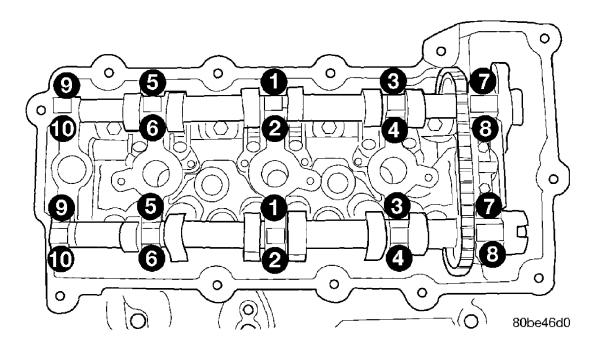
Identifying Camshaft Bearing Cap Tightening Sequence Courtesy of CHRYSLER LLC
